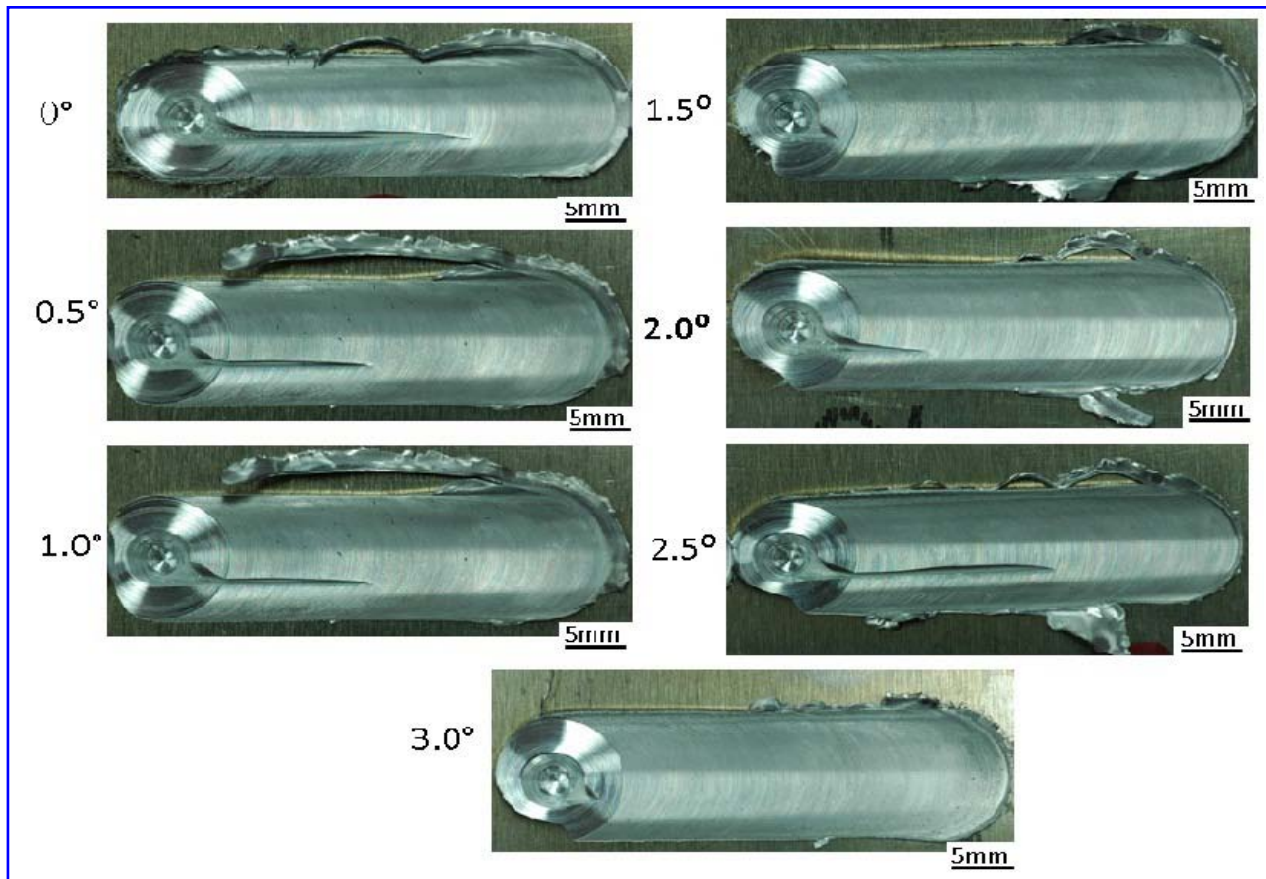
Top surface of weld at different Tool Tilt angle
